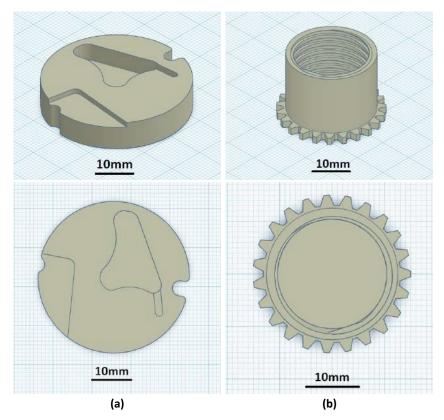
3D models of the produced parts - (a) valve and (b) toothed insert.
